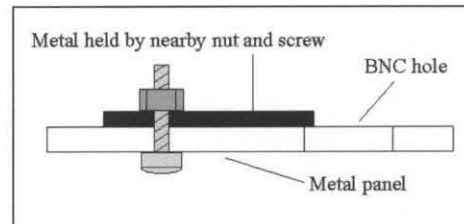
When the metal piece can't be soldered to the panel, it can be held in place using existing nearby hardware, or drilling an extra hole for a screw, nut and lock washer.
